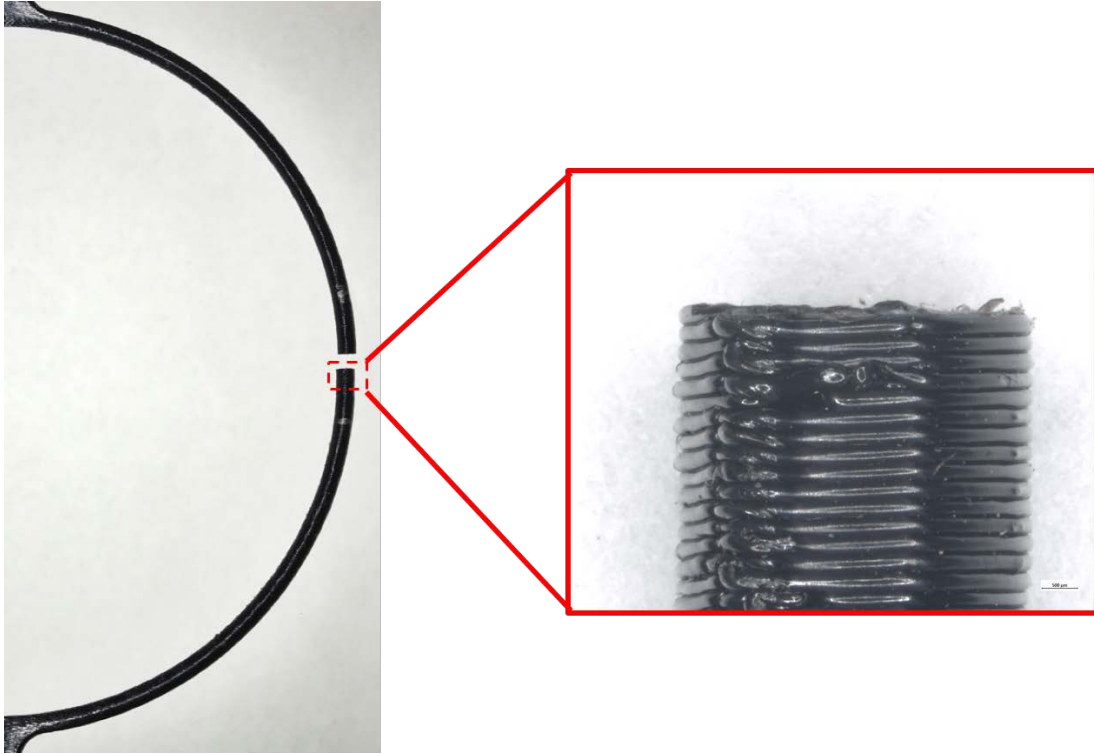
The location of fracture for the failed 90° ring with a magnified side view of the bottom fracture surface.
